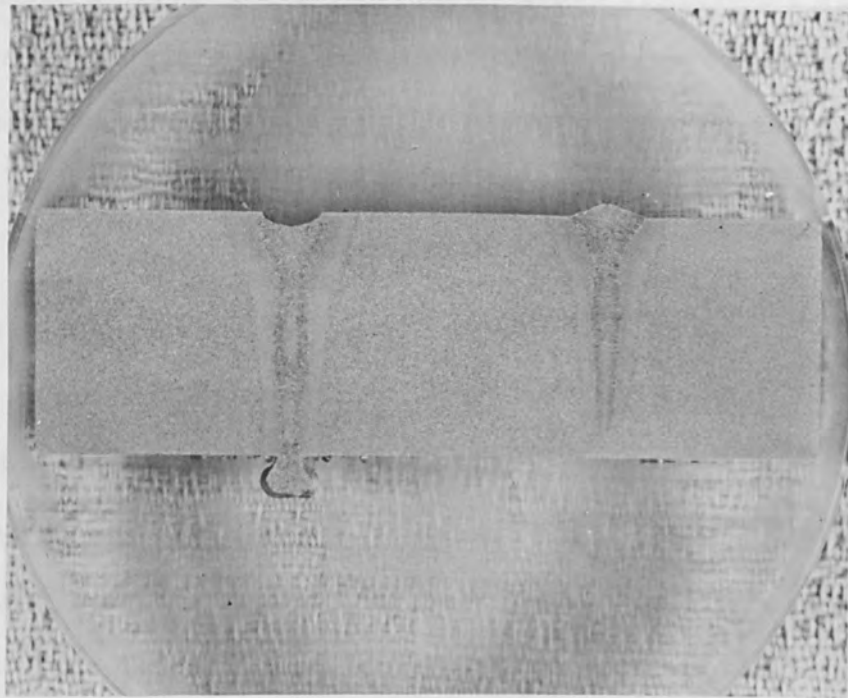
Bead-on-plate welds in 3/4" thick carbon steel.
